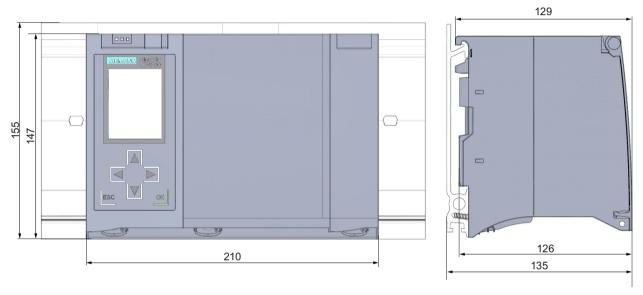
Dimension drawing of the CPU 1517H-3 PN, front and side view
